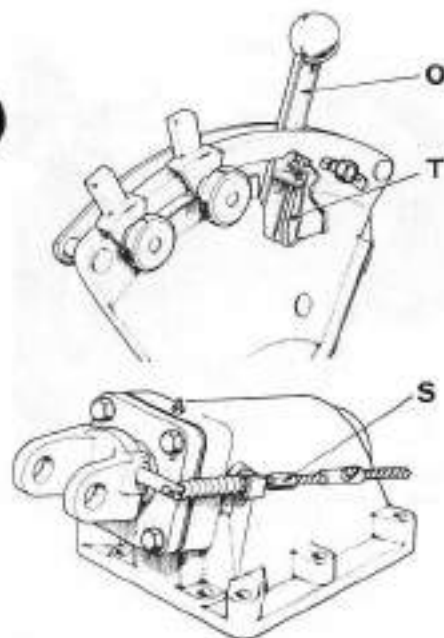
Adjusting points for top link sensing unit flexible cable; refer to text for procedure.
